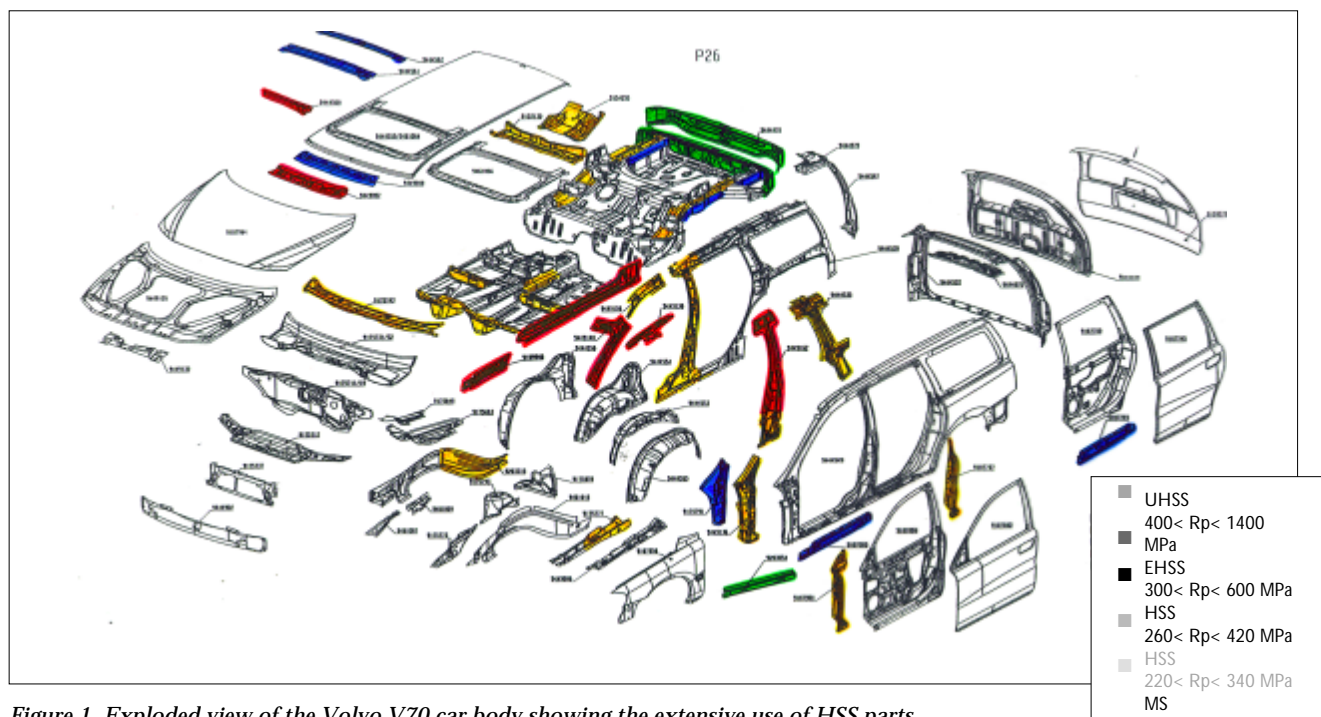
Exploded view of the Volvo V70 car body showing the extensive use of HSS parts.
